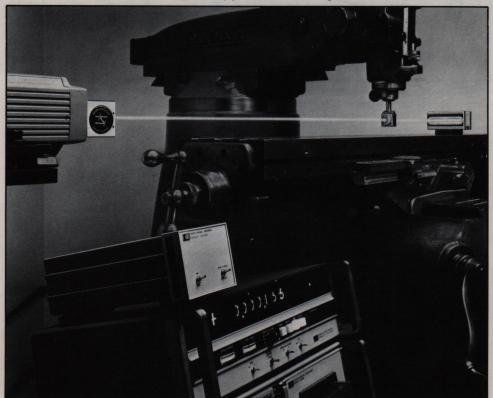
The straightness interferometer, an optical accessory to the 5526A Laser Interferometer System, measures straightness, parallelism, and perpendicularity of machine-tool and measuring machine coordinate motions over a range of approximately 100 feet or 30 metres. Basic accuracy is ± five microinches per foot of travel (± .4 micrometres/metre).
